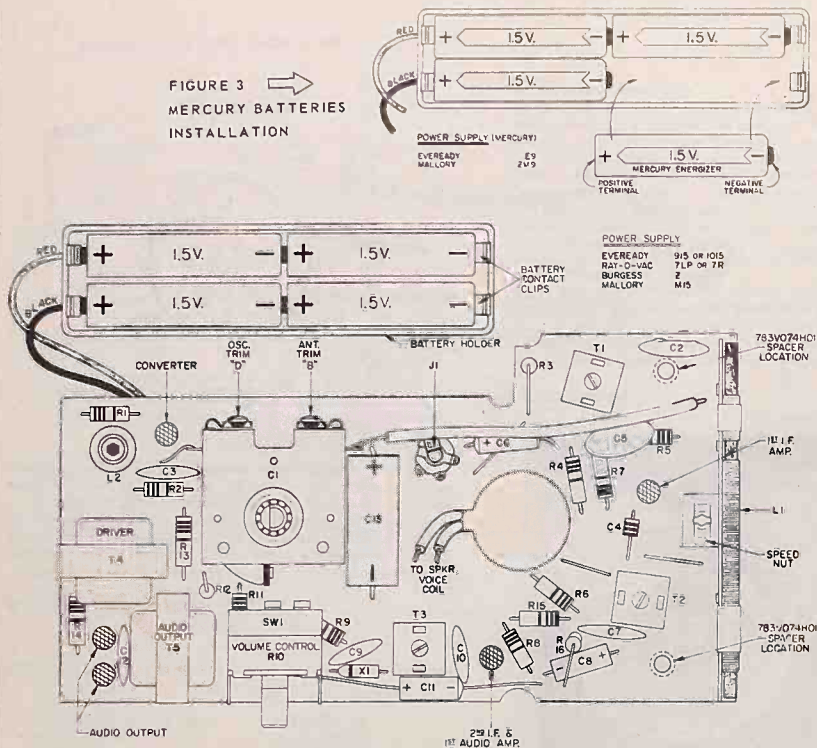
TOP VIEW OF PRINTED CIRCUIT CHASSIS
